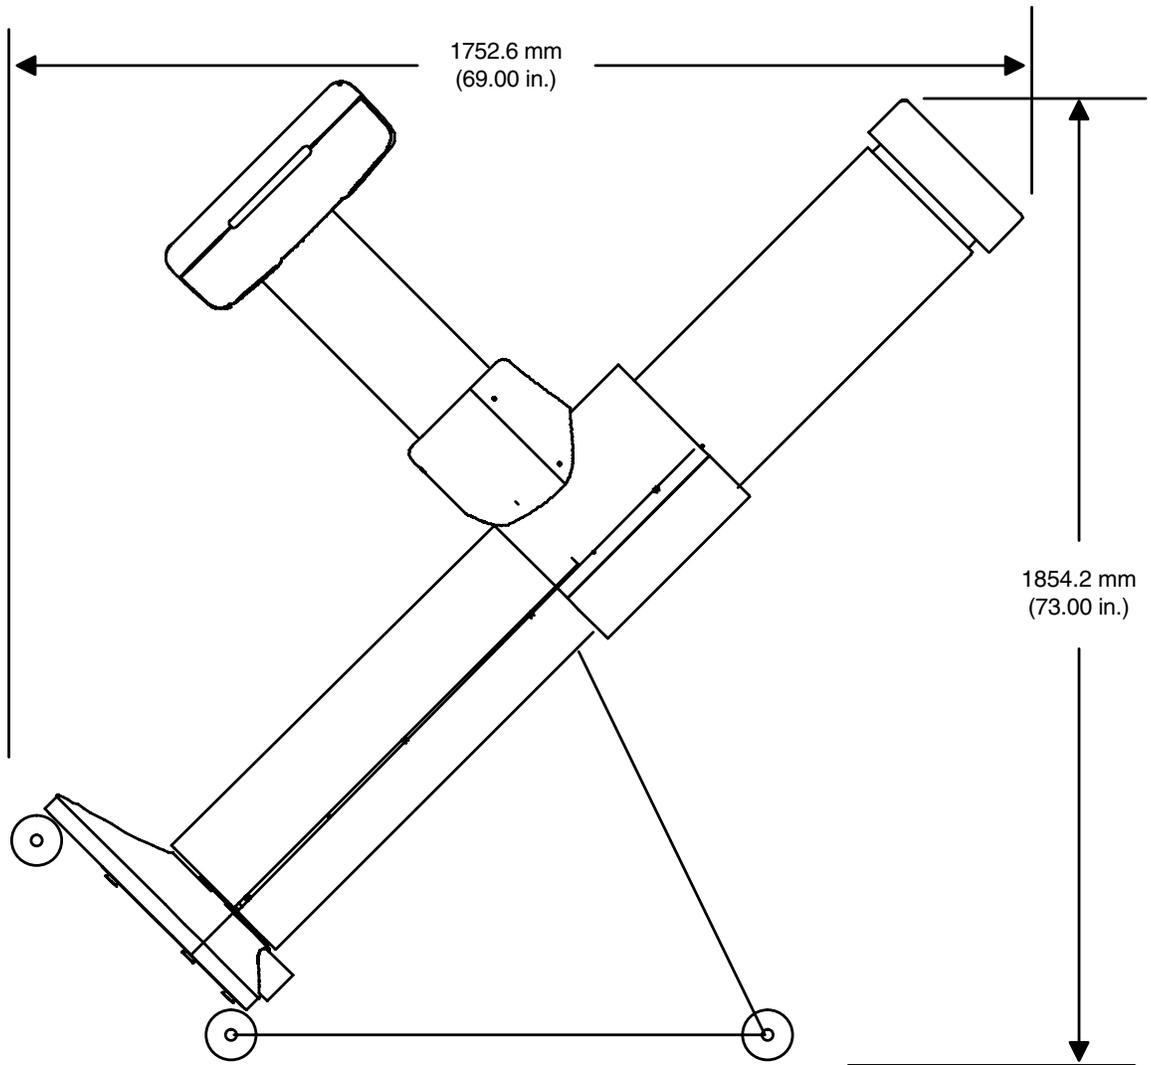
Extended Wall Stand Site In-Transit Dimensions
